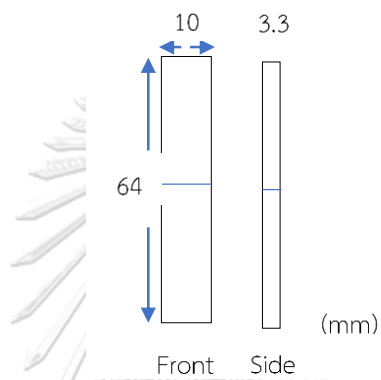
Illustration of the specimen strips size of 64x10x3.3 mm
